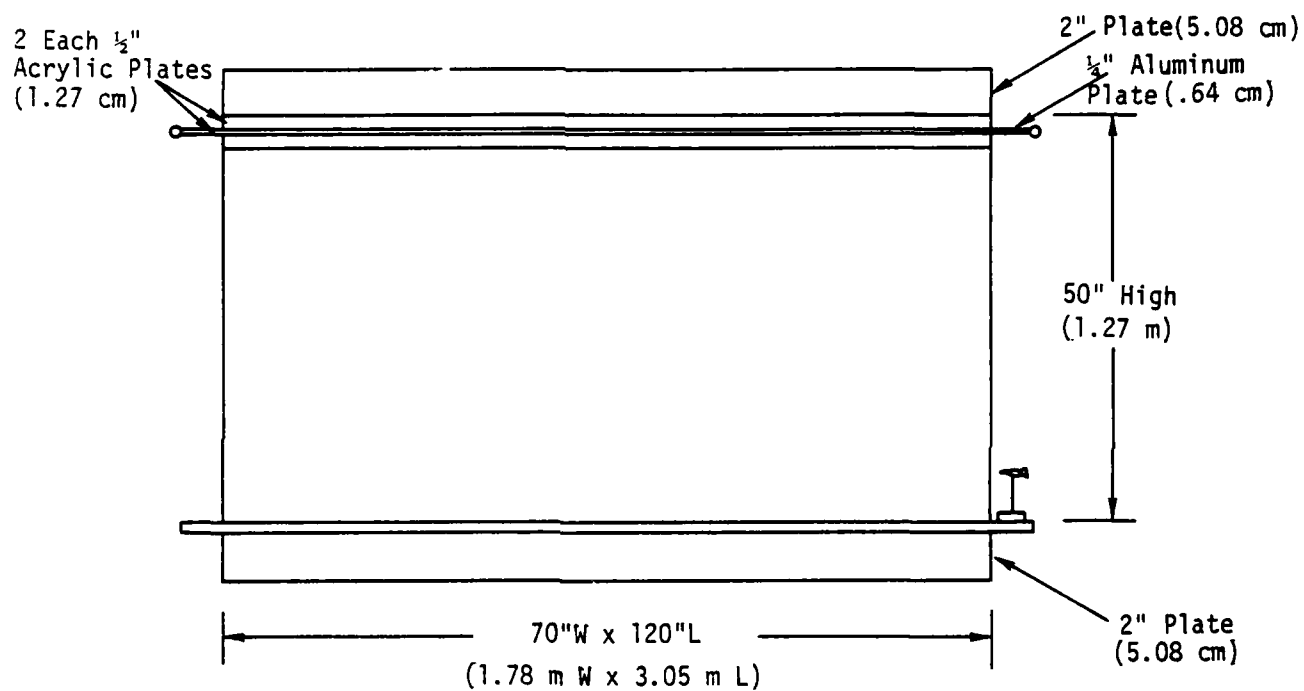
A version of an insulator support stand for the E-4B aircraft.
